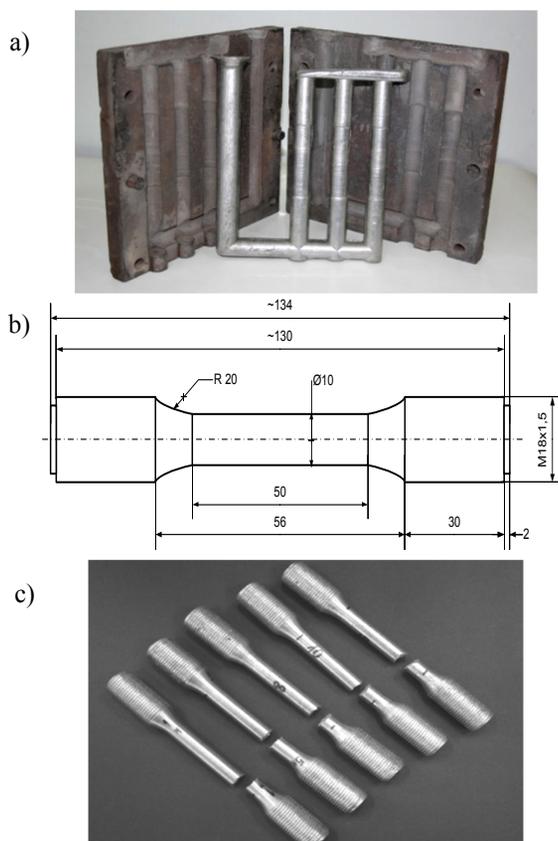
Metal mould along with the casts (a), die diagram of static tensile test (b) and samples after rupture (c)
